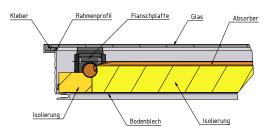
Cut drawing of the collector Collettore Solare Piano CP4M
